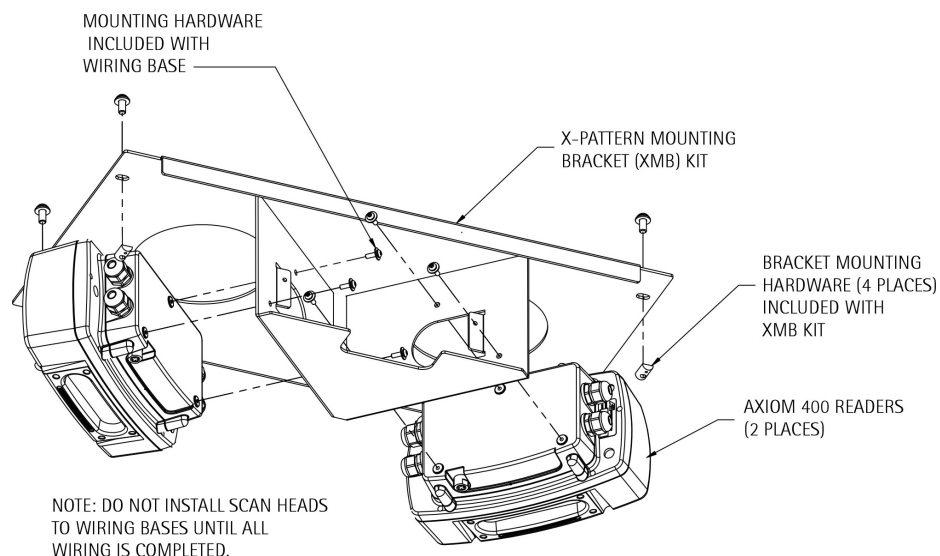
Attaching Wiring Base to X-Pattern Mounting Bracket (XMB)
